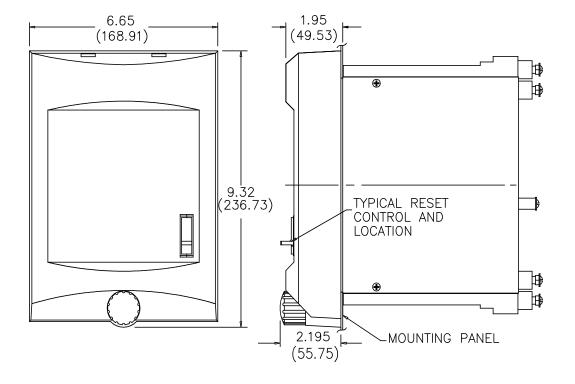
Outline Dimensions, Semi-Flush Mounting
